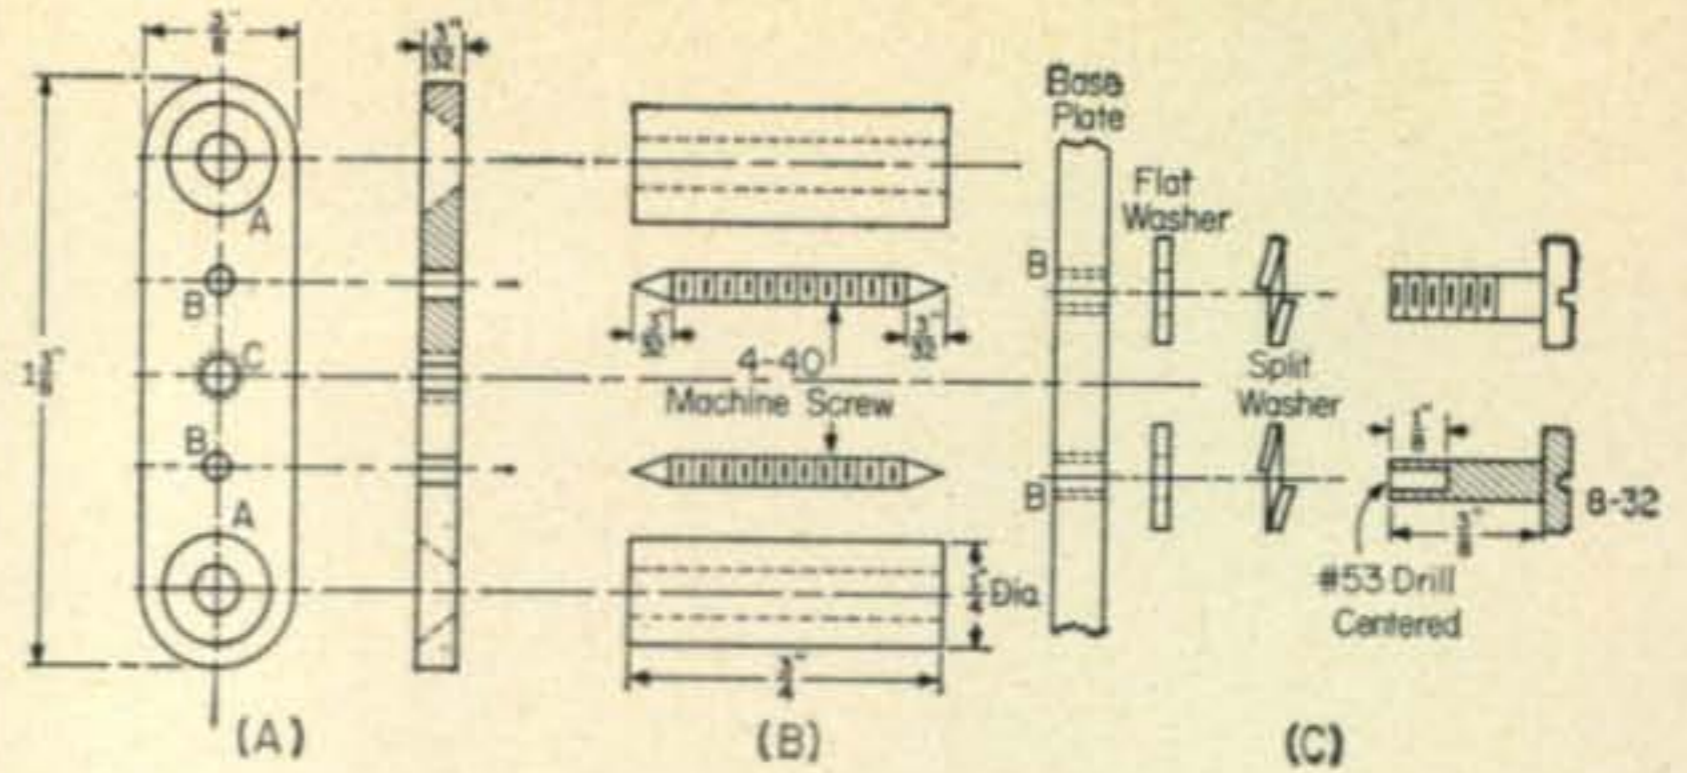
Details of the pivot mounting arch. (A) Top plate is made of 3/32" steel. Holes A are drilled and countersunk for 6-32 flat-head screws. Bearing holes B are drilled with a #53 drill. Hole C fastens the top cover can to the key and is drilled and tapped 6-32. (B) Pivot pins are made of 4-40 plated steel screws. The 3/4" spacers must pass 6-32 screws. (C) Lower pivot bearing screws are drilled with a #53 drill.
